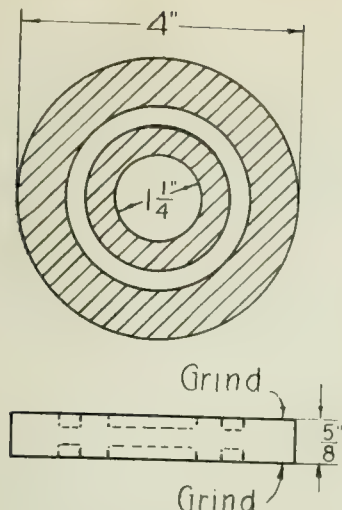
DETAIL OF A GEAR BLANK GROUND.
